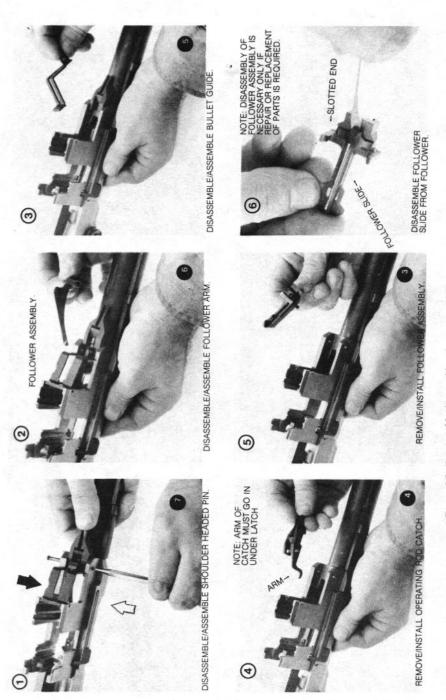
Disassembly / assembly of magazine follower group (1 of 2).
